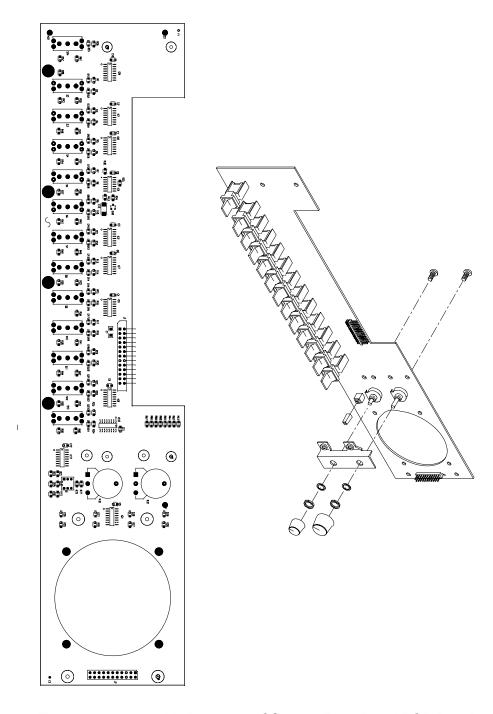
Assembly Drawing—ICS-2003 Front Panel PCB Rev. B
